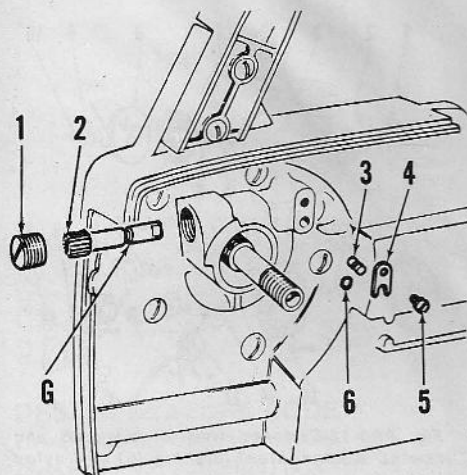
The oiler pump (2) is rotated by a worm gear on crankshaft.
